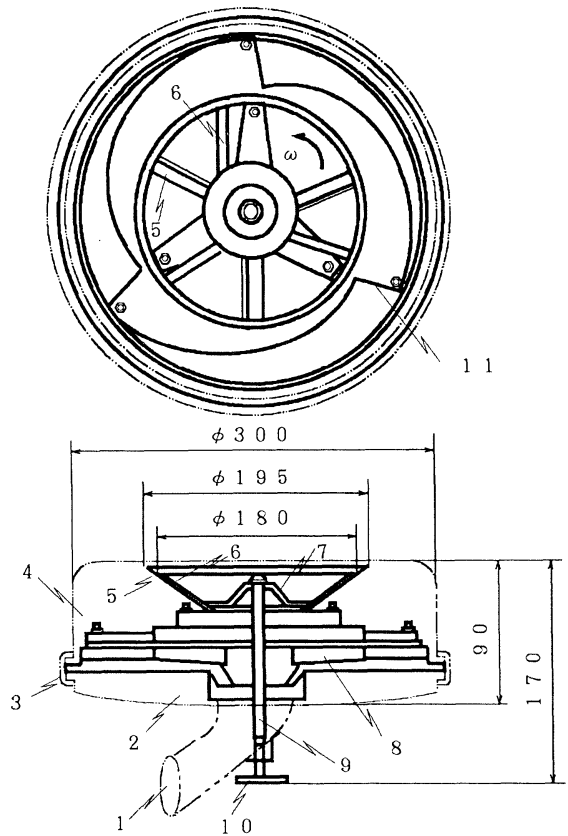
Construction of the rotary cutter. 1 : drain port, 2 : upper cover, 3 : sealing ring, 4 : lower cover, 5 : fixed knife, 6 : rotary knife, 7 : disk board, 8 : impeller, 9 : rotary shaft, 10 : revolution indicator, 11 : inlet port into impeller.
